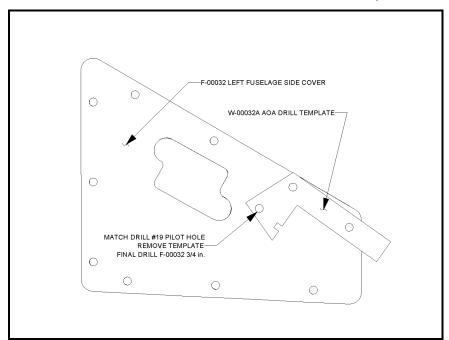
W-00032A AOA Drill Template located on left F-00032 Fuselage Side Cover.
